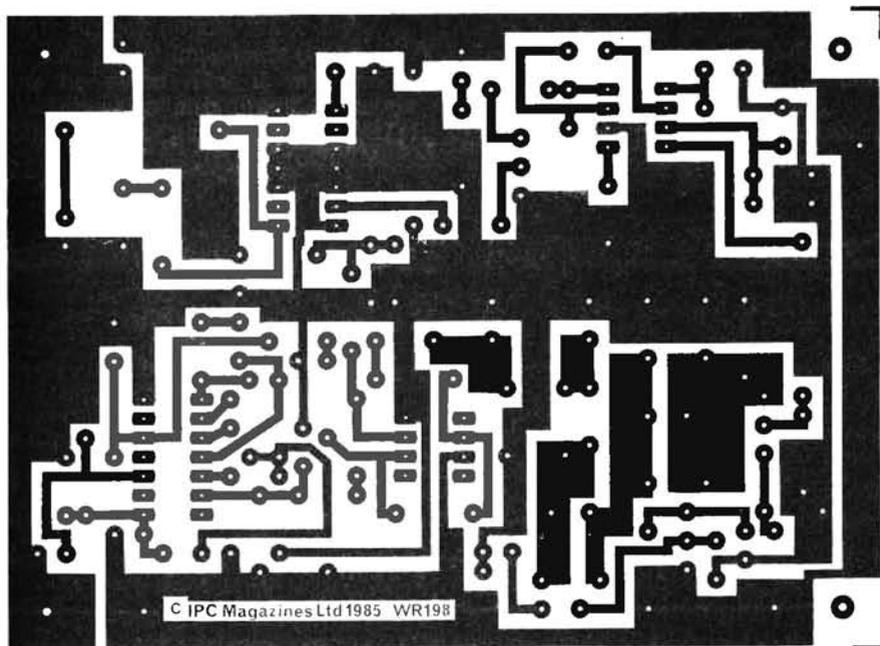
The full size p.c.b. track pattern and component placement for Board 3 of the PW Coine
